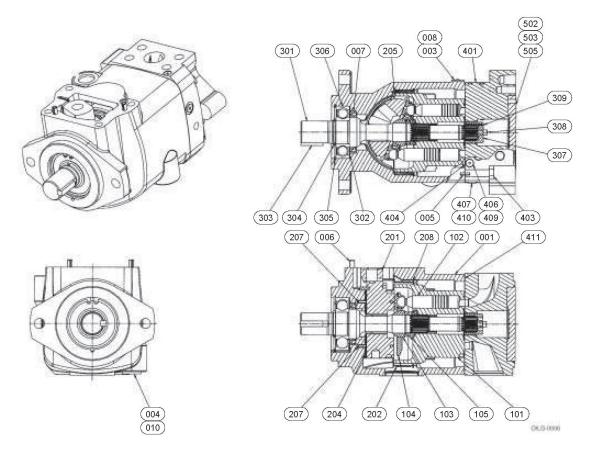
Cross section and plan view parts drawing, PVG 100/130 (516246 sheet 1 of 3).
